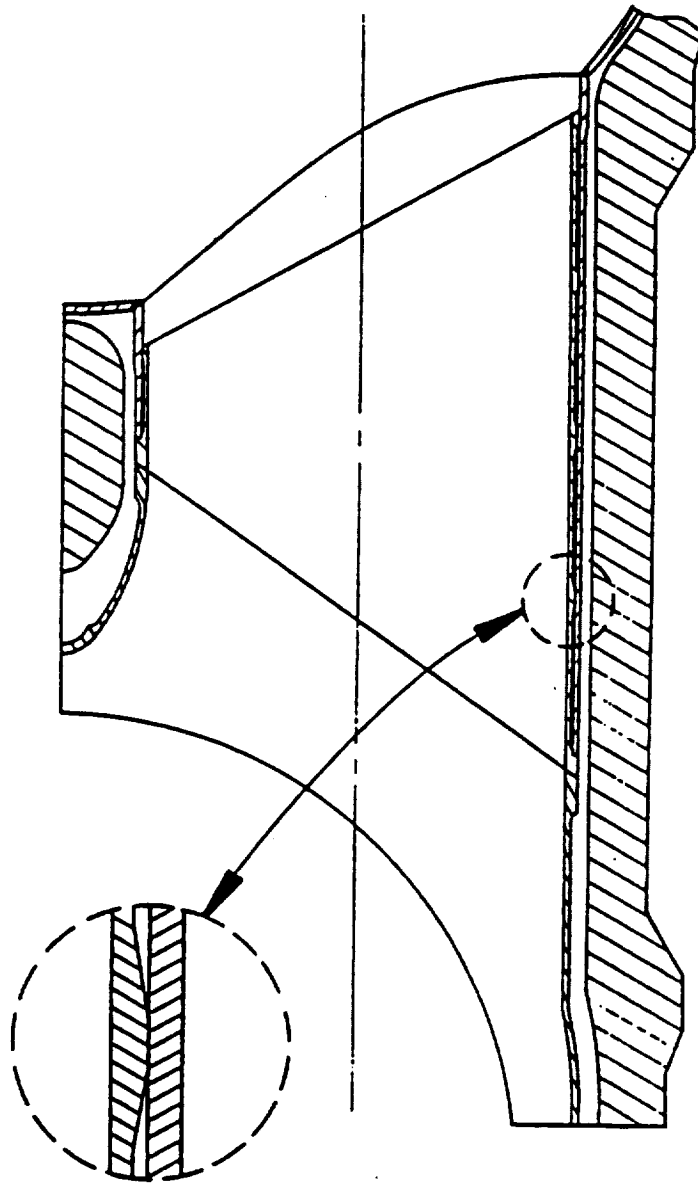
,12 Integrally Machined Motion Limiters in the New Transfer Tube Liner Designs
